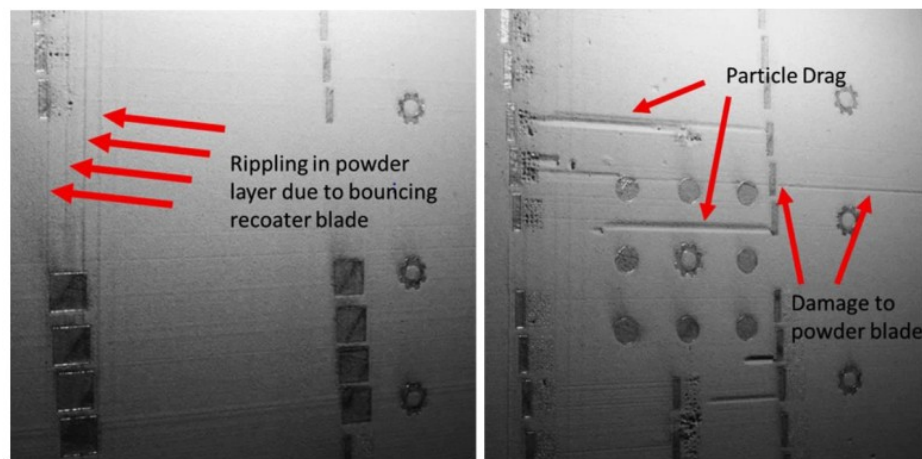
In-situ image showing powder layer spread defects due to recoater blade failure and sintered particle drag [54].
